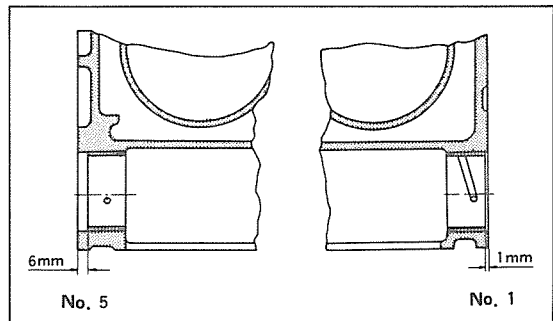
A.55 Cam Shaft Bushing Fitting Positions
